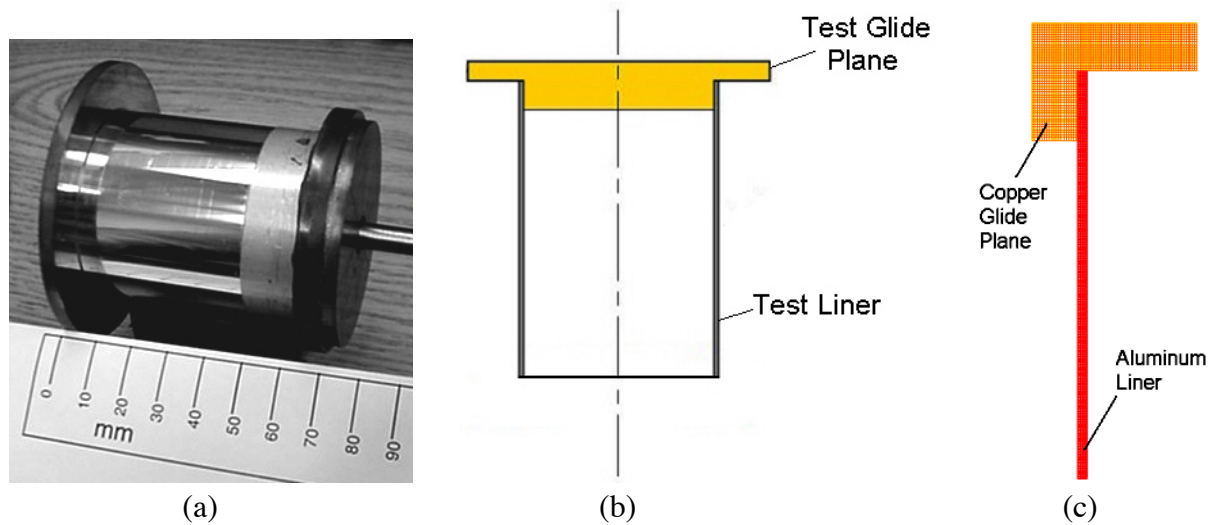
(a) Machined and assembled test specimen, (b) test specimen geometry, and (c) test specimen finite element model
